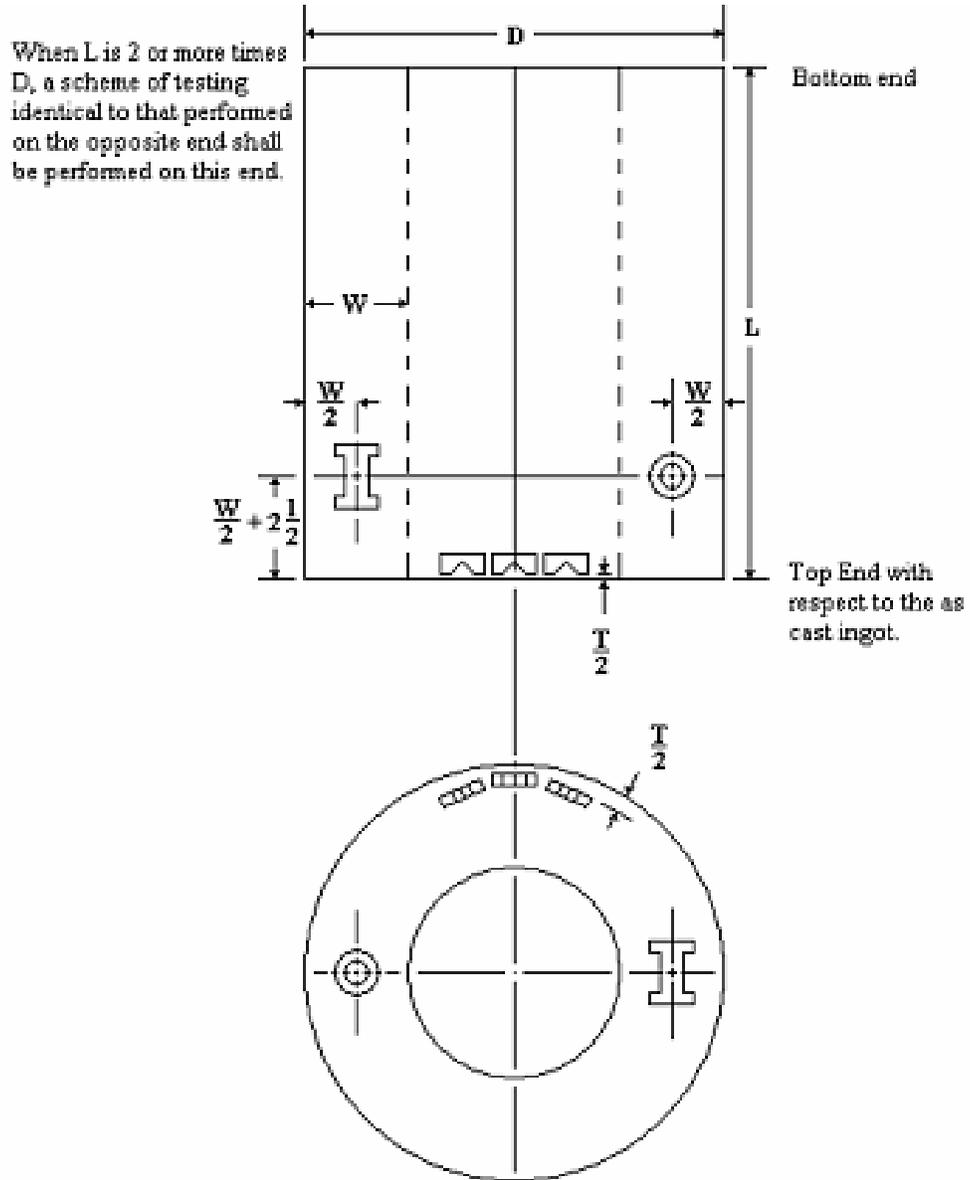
Typical Schematic Diagram of Test Specimen Location for 6-Inch Thick Forgings of Hollow Circular Cross Section (See C.4.4.2.2 for details on test specimen location.)
